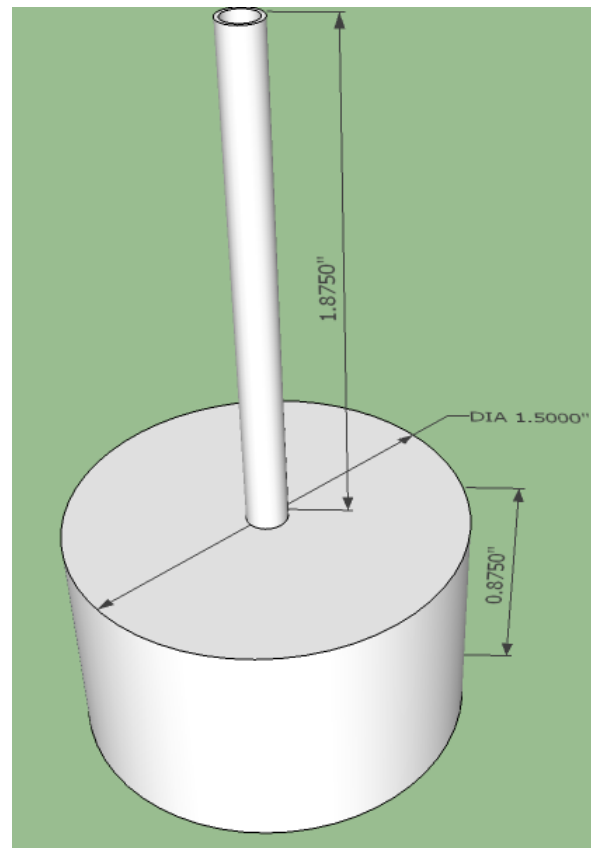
The bottom stainless steel insert designed for the CHTA, all dimensions are in inches; also shown is cartridge heater guide tube.
